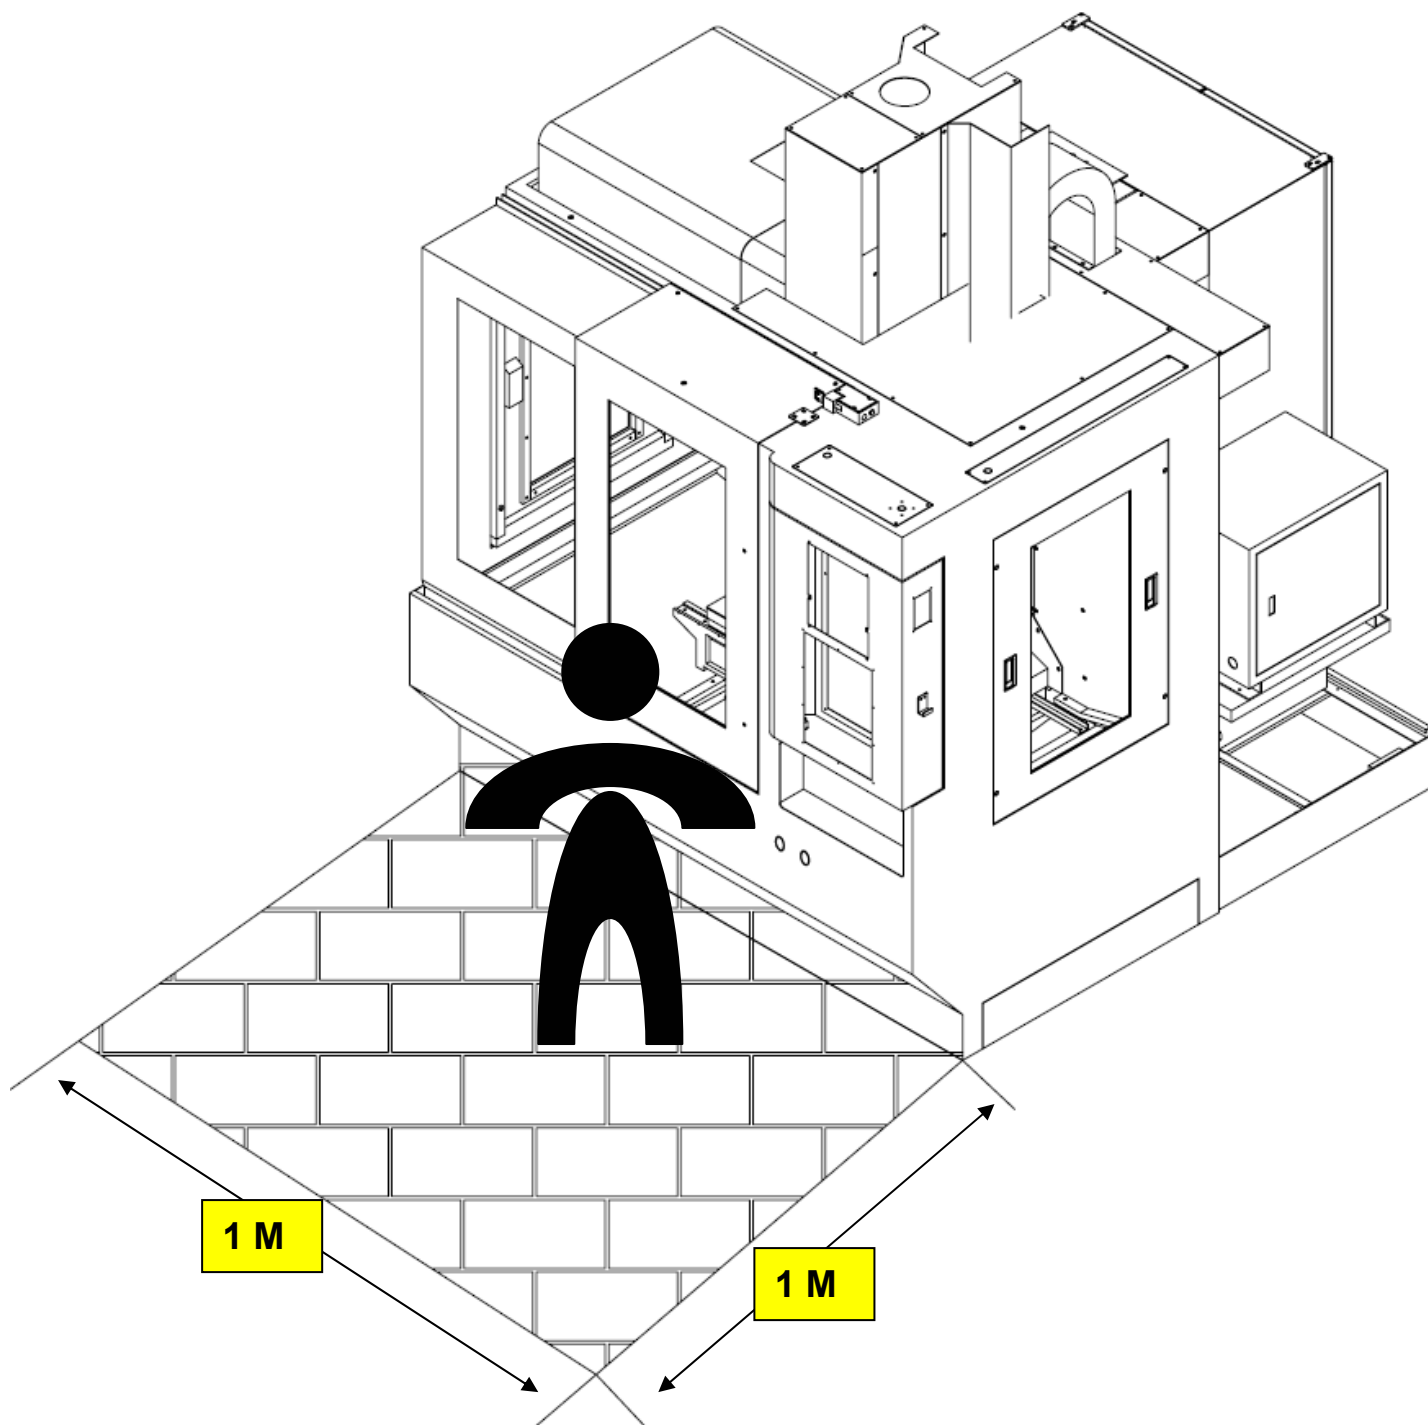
OPERATOR POSITION VIEW OF MACHINE
